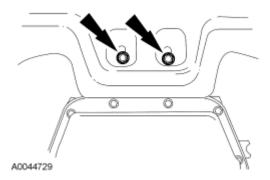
Rear Transmission Insulator Nuts Courtesy of FORD MOTOR CO.
